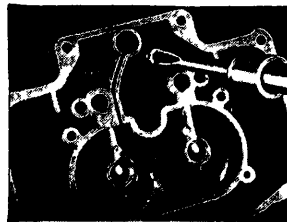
Install metering jets and new gaskets. Install jets snugly but not so tight as to cause distortion
